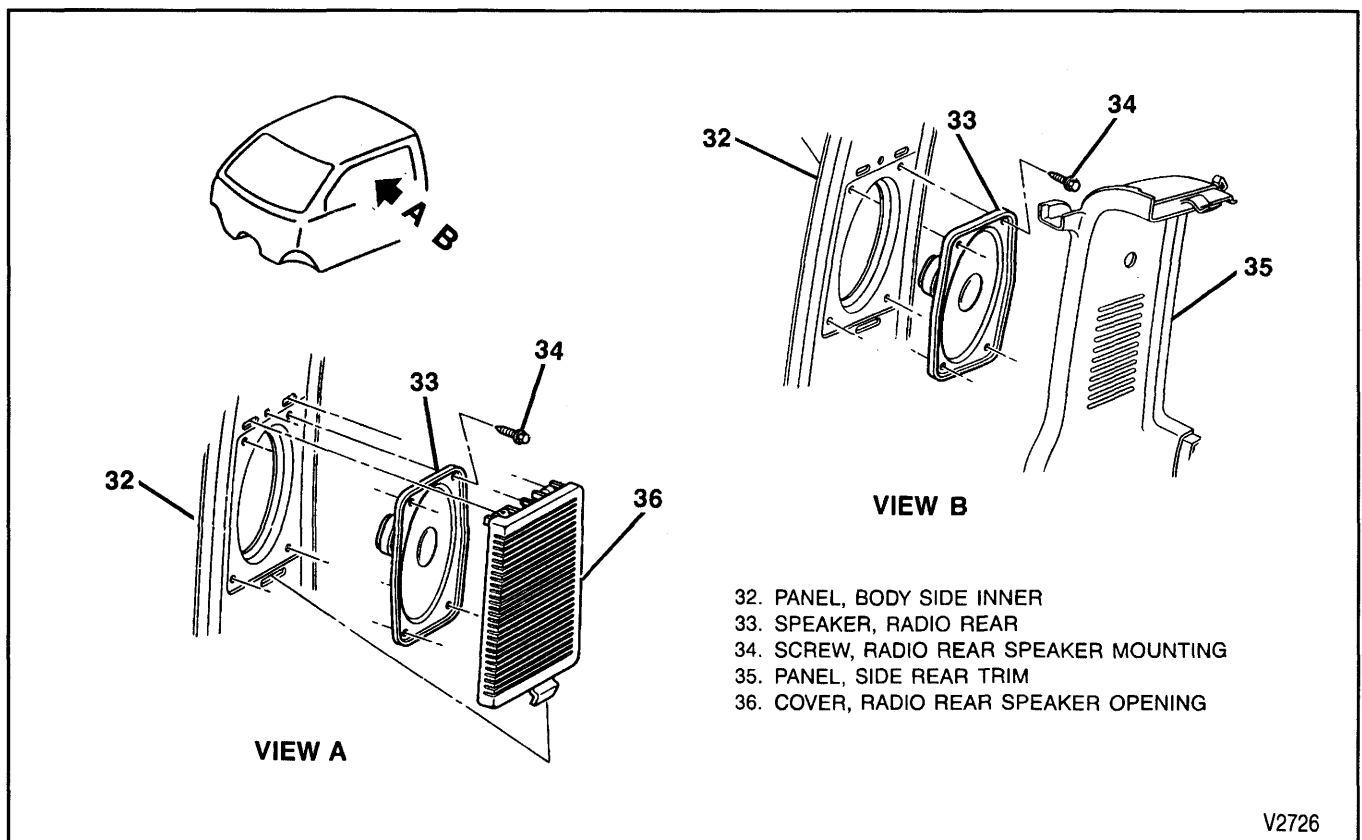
Rear Speaker Assembly (Pickup/Chassis-Cab Models)
